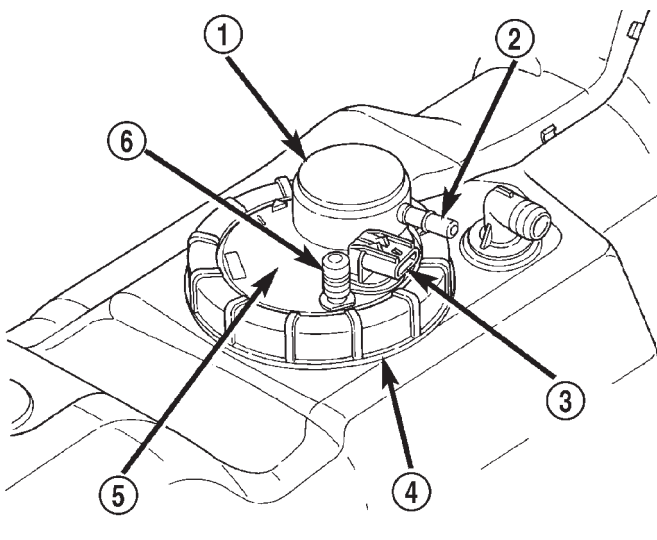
Fuel Pump Module—Gas Engine With 35 Gallon Tank
